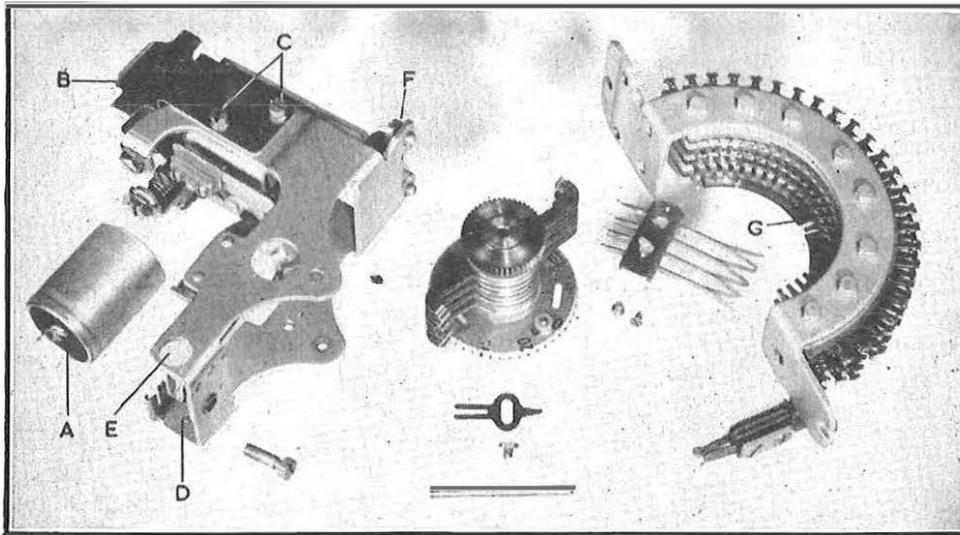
EXPLODED VIEW OF TYPE 3 UNISELECTOR AND BANK.
